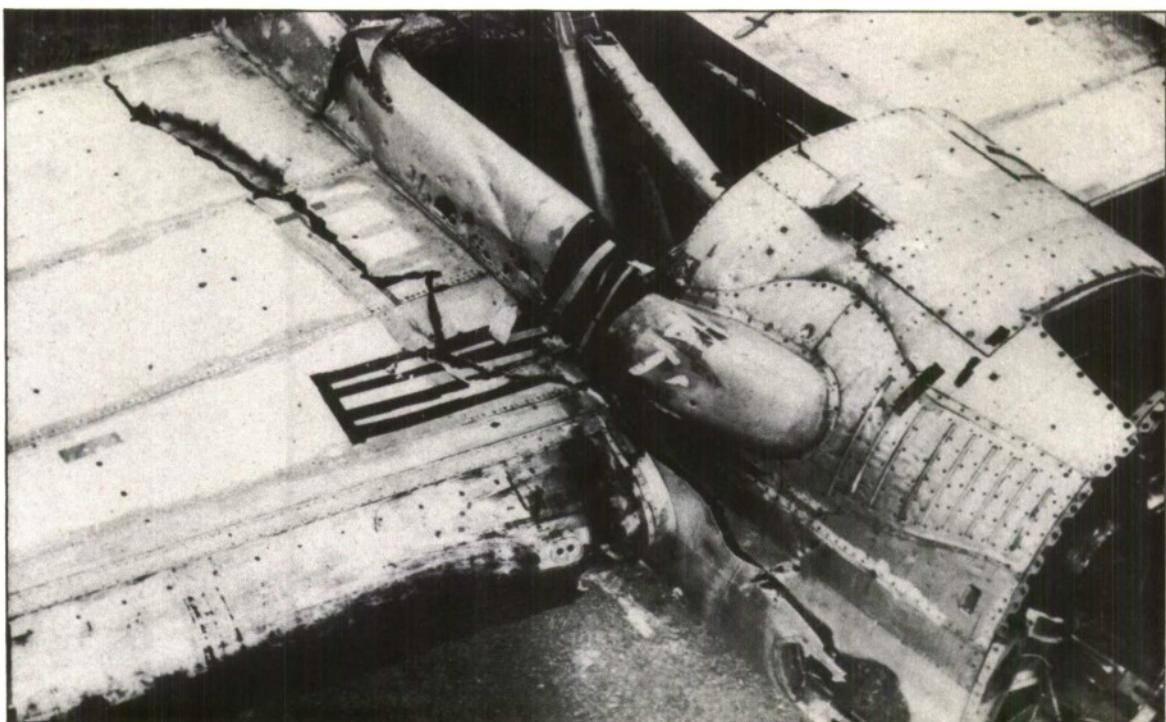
FIRING 4. ROD DAMAGE TO LOADED PORT WING
